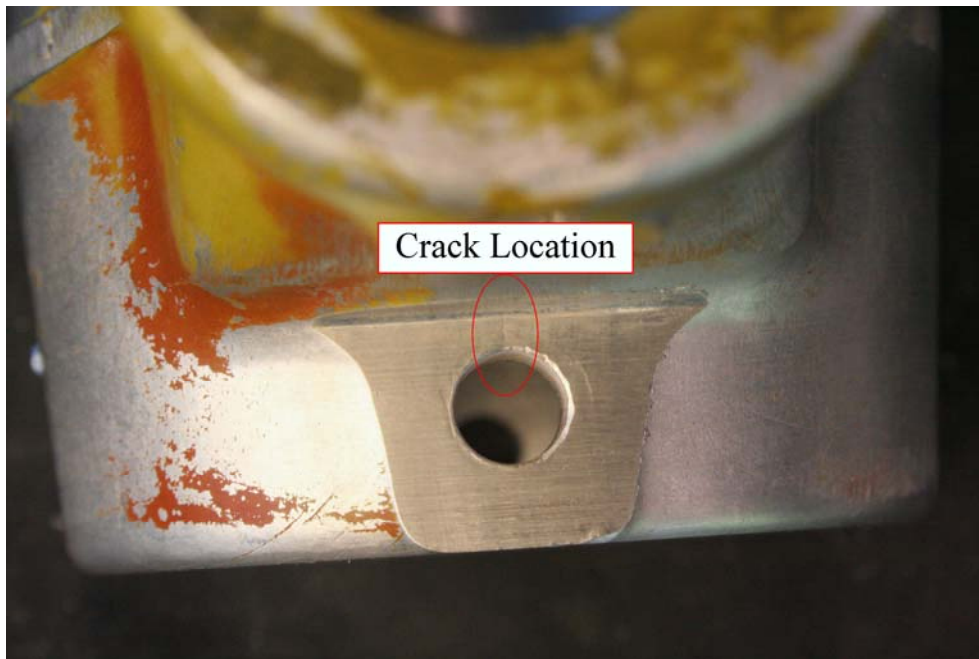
Hole 1 Crack Penetrating on Surface C, A/C N5274P
